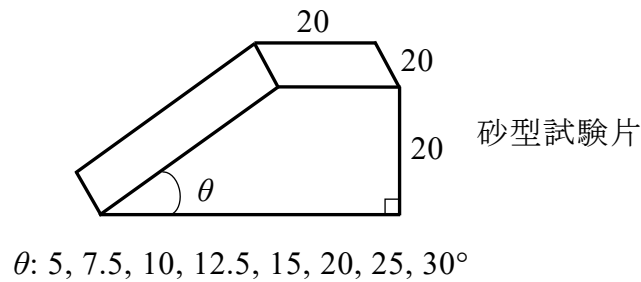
Shape of sand mold specimen (unit: mm).
